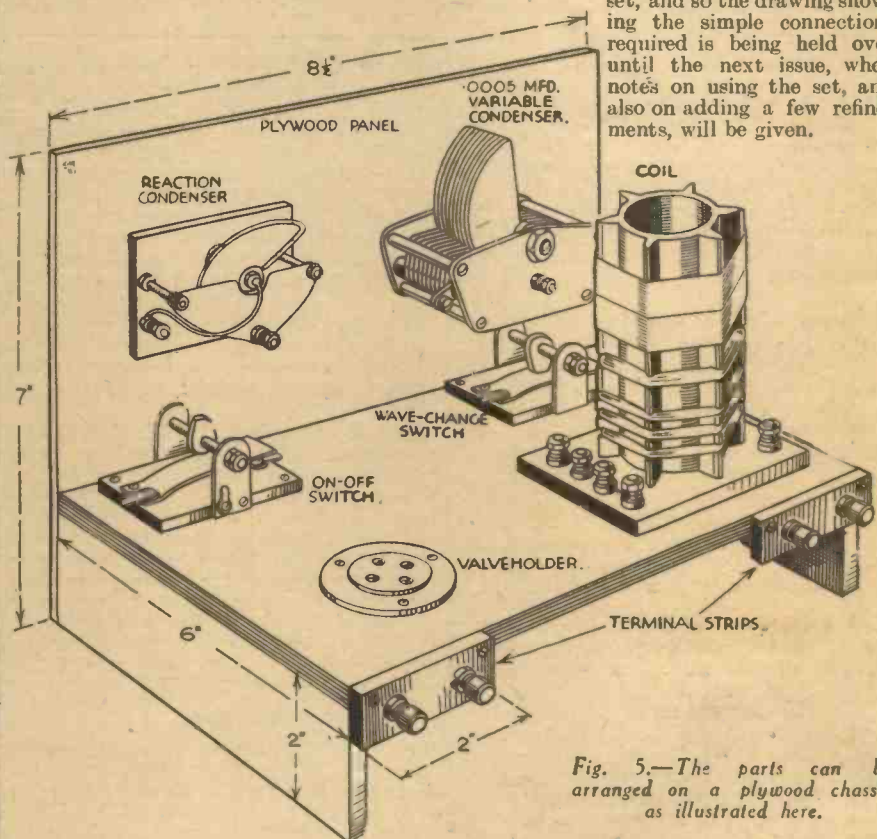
The parts can be arranged on a plywood chassis as illustrated here.
